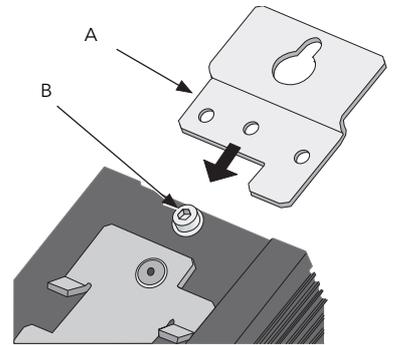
Fitting upper bulkhead mounting bracket (32A unit shown; 63A units similar)
